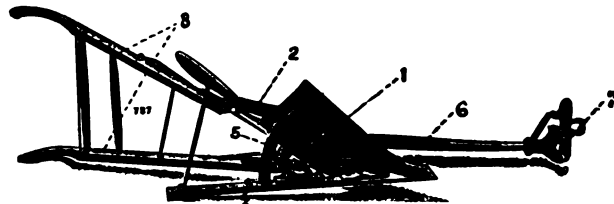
Bottom view of a modern plow, showing the parts. 1, share; 2, moldboard; 3, landside; 4, frog; 5, brace; 6, beam; 7, clevis; 8, handle.
